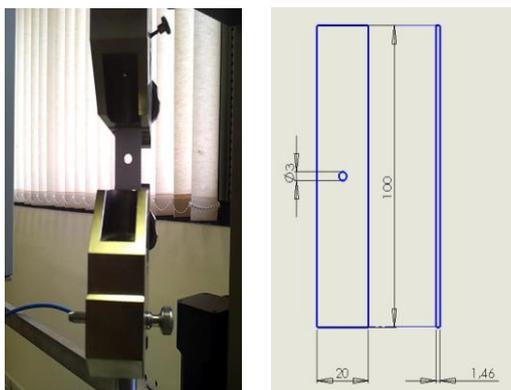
Experimental set-up: A test specimen held by the sample holder of the tensile testing machine (left), and dimensions of the test specimen (right).
